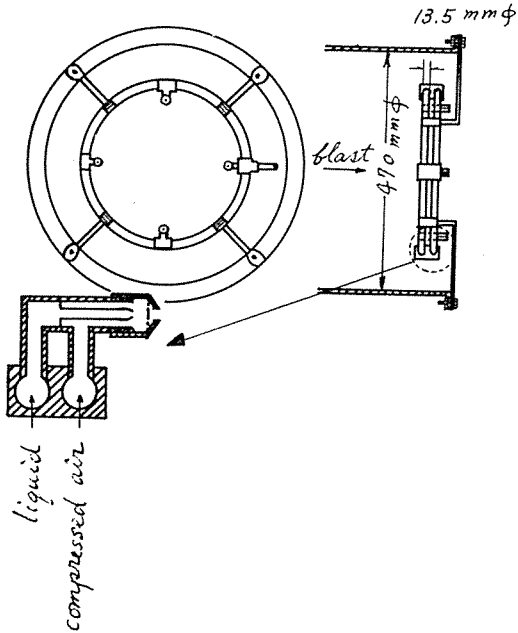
Dimensions of nozzle parts of the 1/10 model speedmister.
